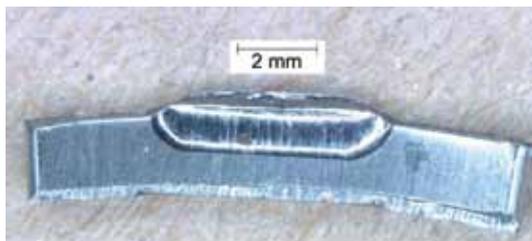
Example of deformed shim stock after engagement of meshing gear teeth.
